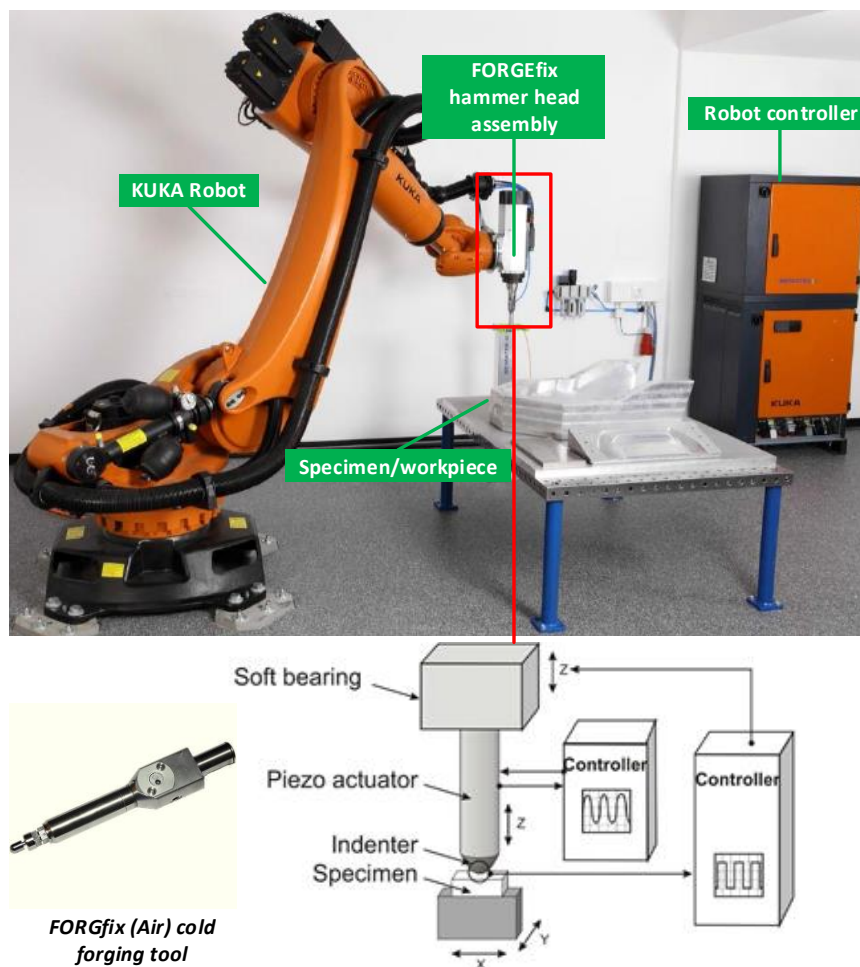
Hammer peening equipment components and schematic illustration of the hammer peening plant [111]. Surface processing with a KR QUANTEC and KUKA.CNC; main components include robot, controller, hammer head and specimen/workpiece
